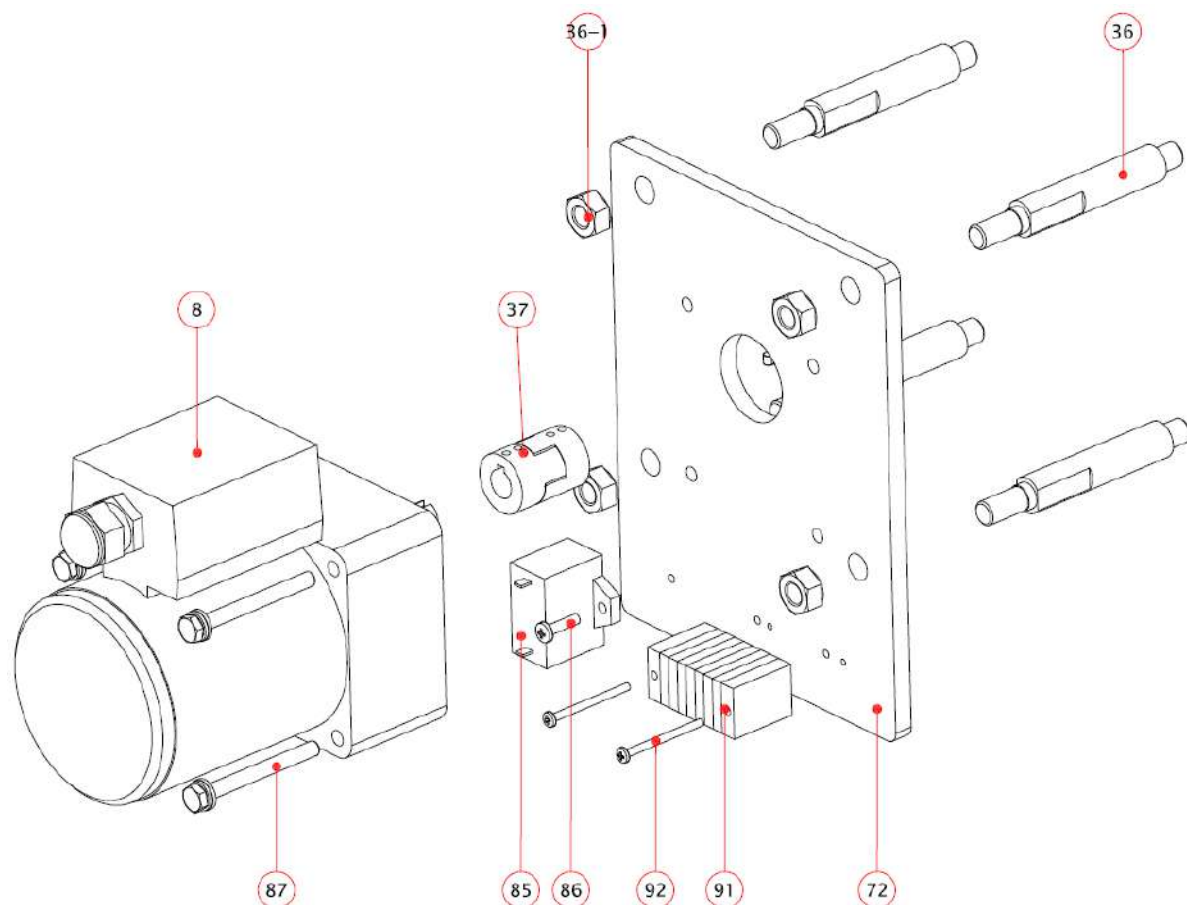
General Assembly of the UV Unit (Explosion proof type)
